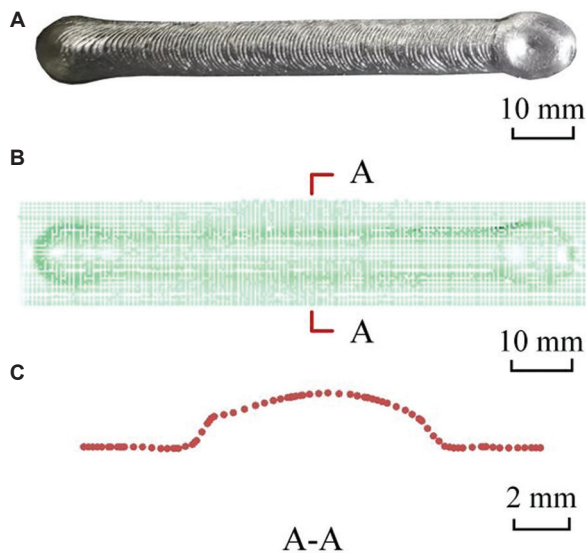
Schematic diagram shows the quantification of weld-bead width and height. (A) Actual morphology of a weld bead in the training set. (B) 3D point cloud obtained through line-laser scanning. (C) Extracted weld-bead contour
